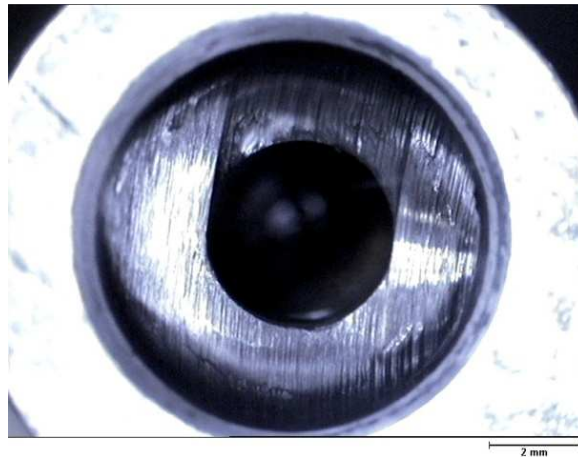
Wear damage of the rocker arm at the rocker arm - pushrod interface.
